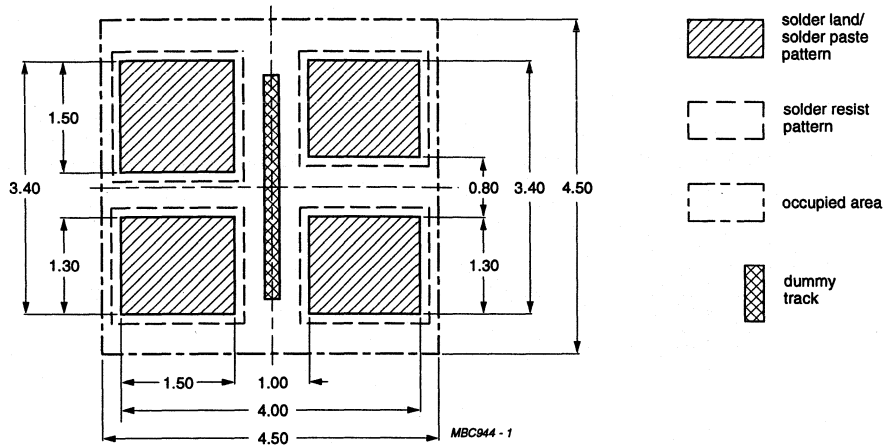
Wave soldering footprint for SOT23; typical dimensions.
